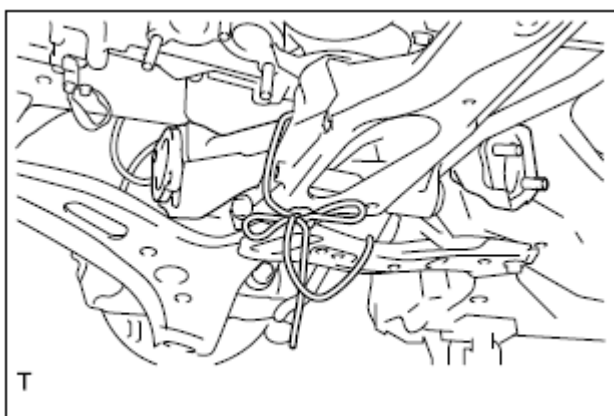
Tying Exhaust Pipe Sub-Assembly FR To Front Suspension Crossmember Sub-Assembly Using Rope
